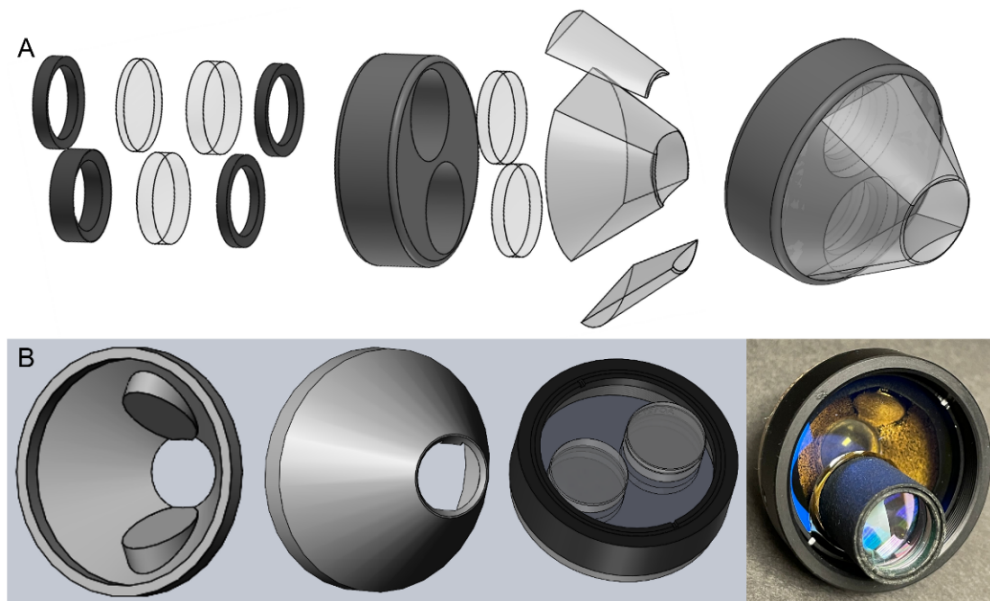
A) Exploded view of the MgF_2 goniolens manufacturing process showing each one of its parts separately on the left and the fully assembled goniolens on the right. B) Design of the 3D printed goniolens shell (first and second image) and fully assembled model of the goniolens (third image), and picture, right, of a fabricated 3D metal printed goniolens lens (not blackened to show interior) with the mounted air-spaced doublet focusing lens for the 63° mirror.
